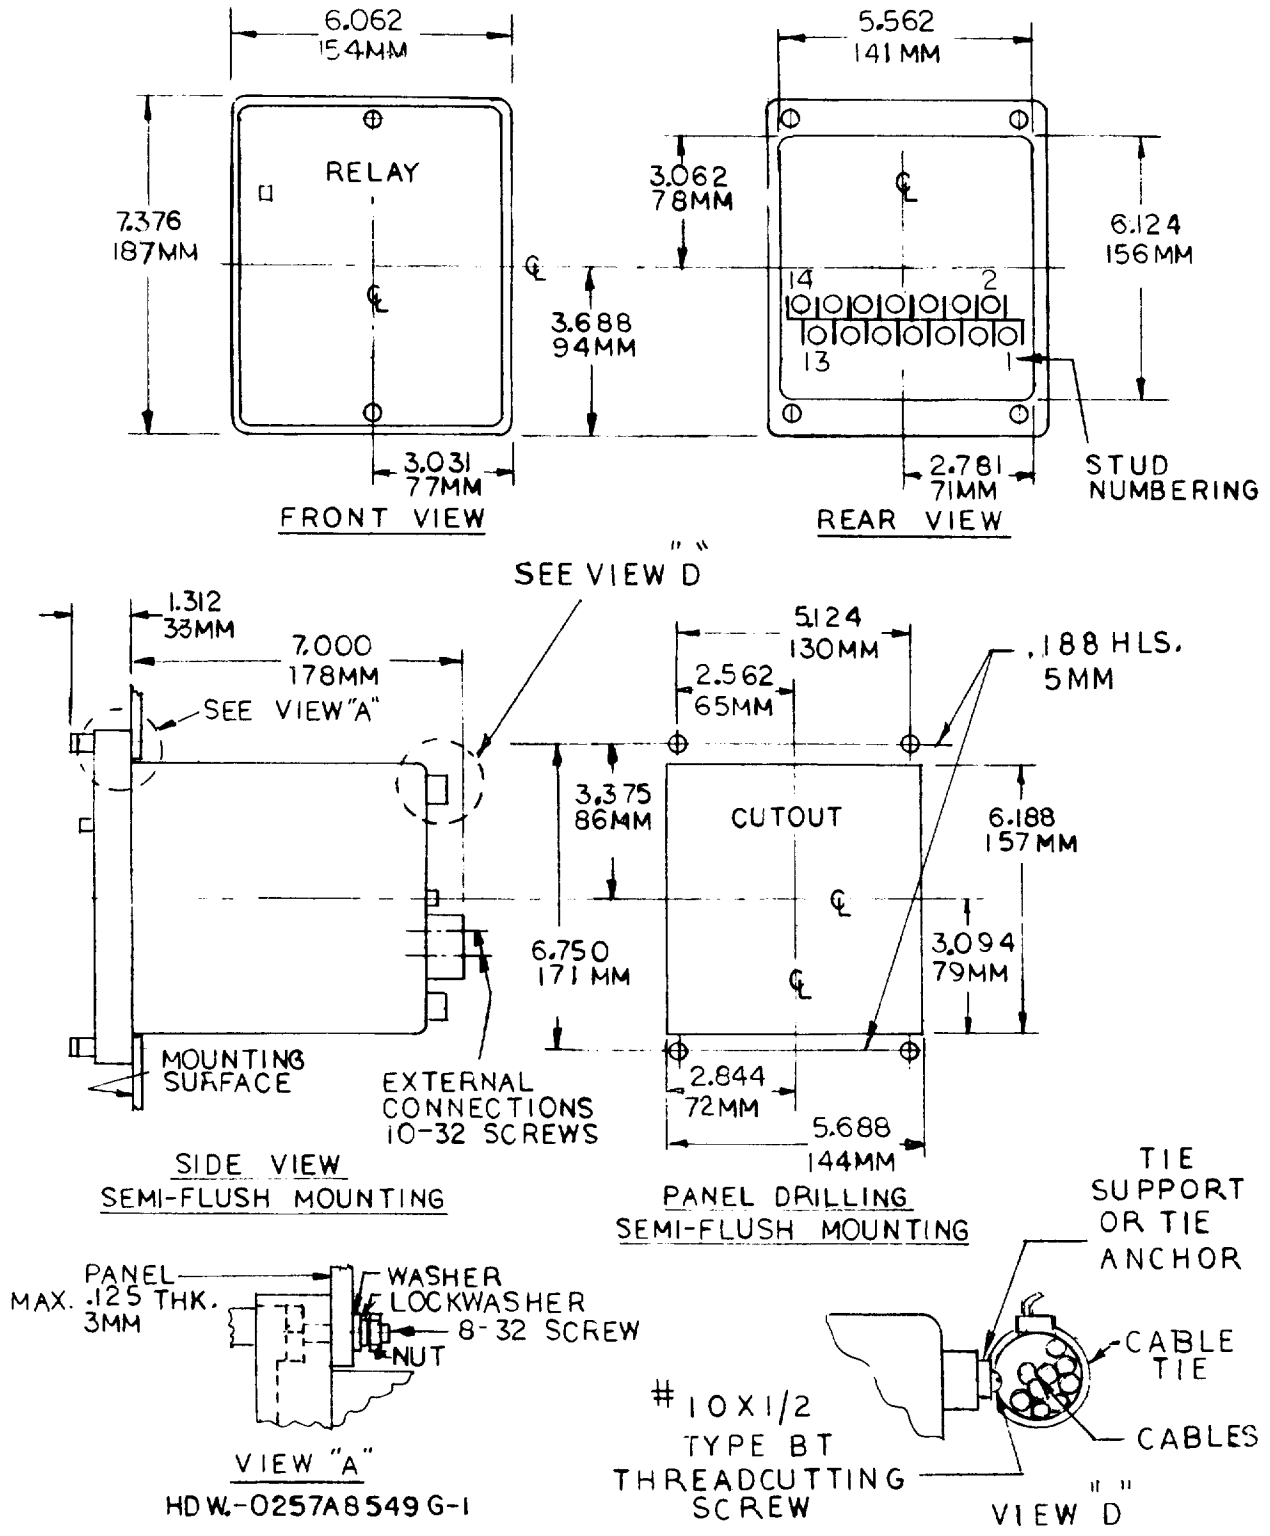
(0257A8452-3 Sheet 1) Outline and Panel Drilling for Semi-Flush Mounting of IFC95 Relay
